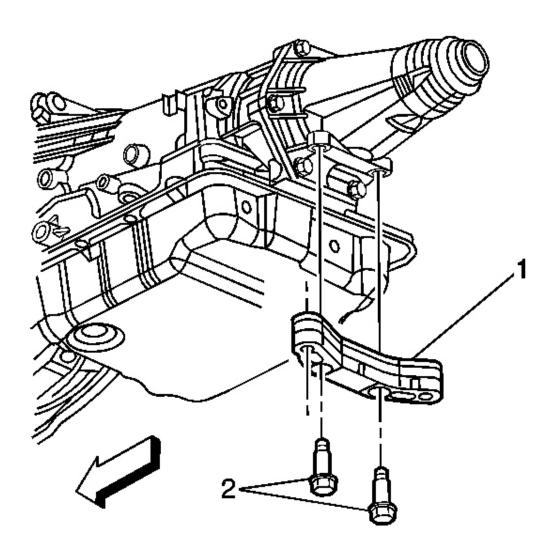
View Of Transmission Mount Spacer & Mounting Bolts Courtesy of GENERAL MOTORS CORP.
